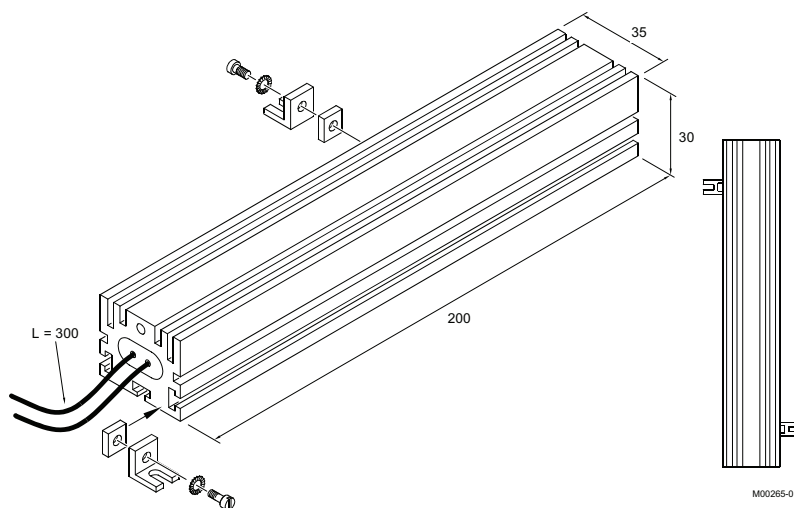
Overall dimensions, resistor 56-100Ω/350W
